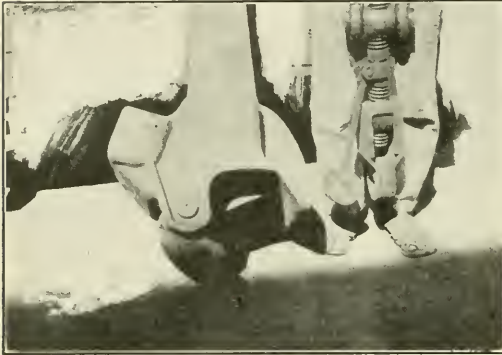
Altered Head of A. R. A. Coupler. Lock Removed to Side to Enable Screw Coupling to be Hung in Centre
